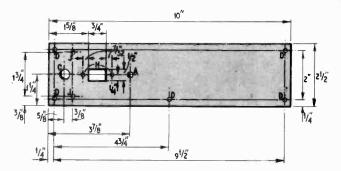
Tuning drive assembly is mounted on this aluminium plate (front view)
